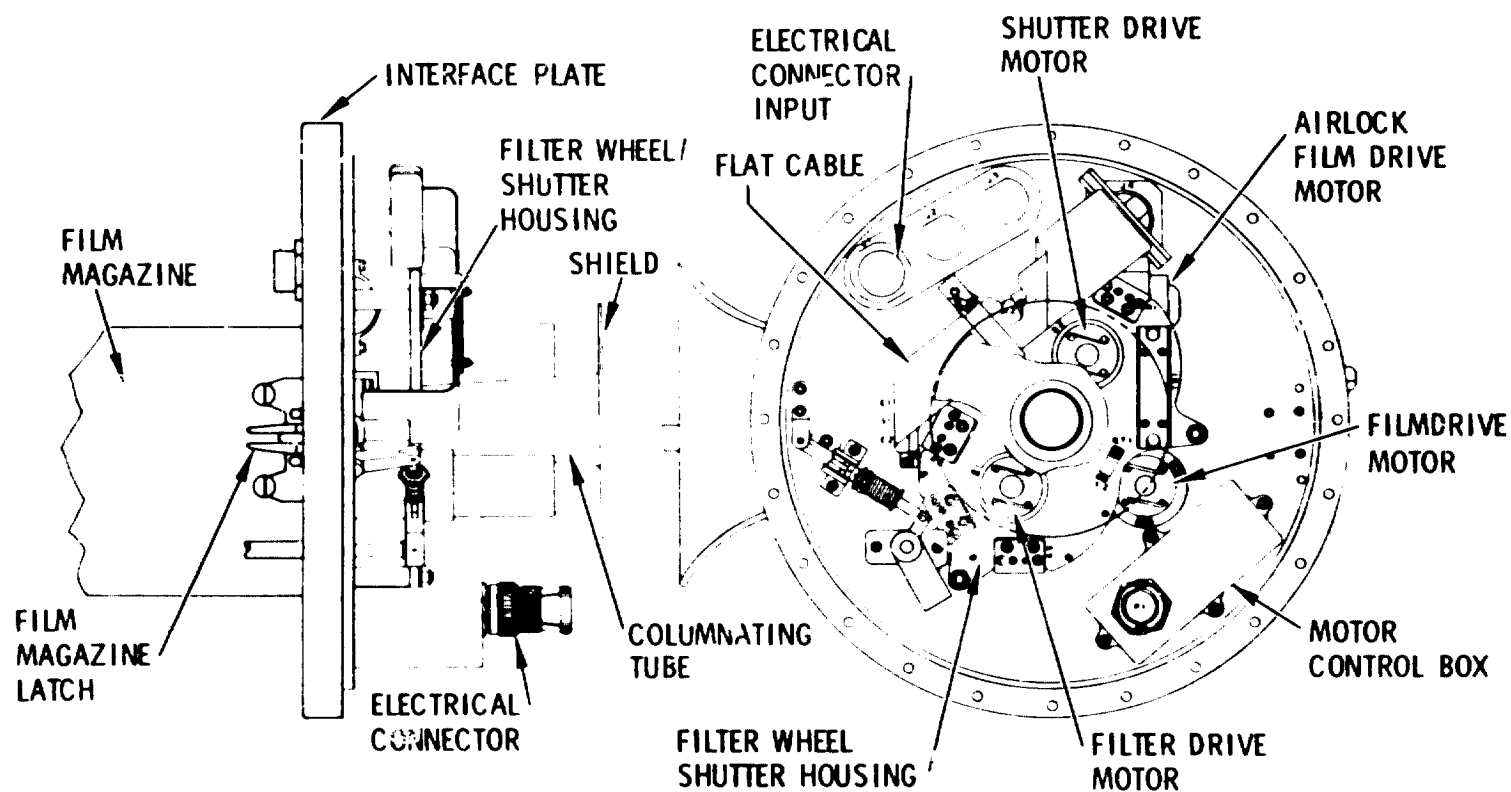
S-056 X-Ray Telescope Interface Plate/Shutter Assembly
